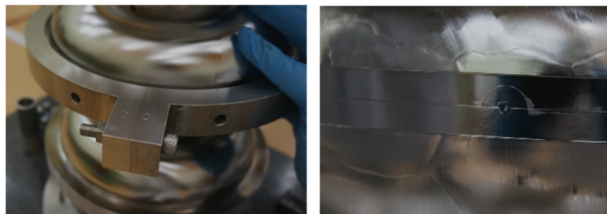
Equator with supporting jig(left) and equator after spot welding(right).
